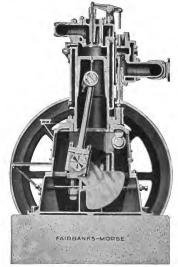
Sectional View of Multi-Cylinder Vertical Producer Gas Engine.
